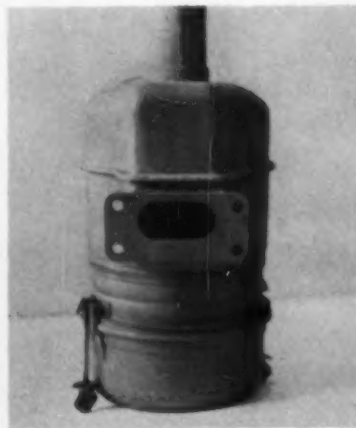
Finished air cleaner with neck tube attached and lower body shell welded to the upper dome assembly. Five types are made.
